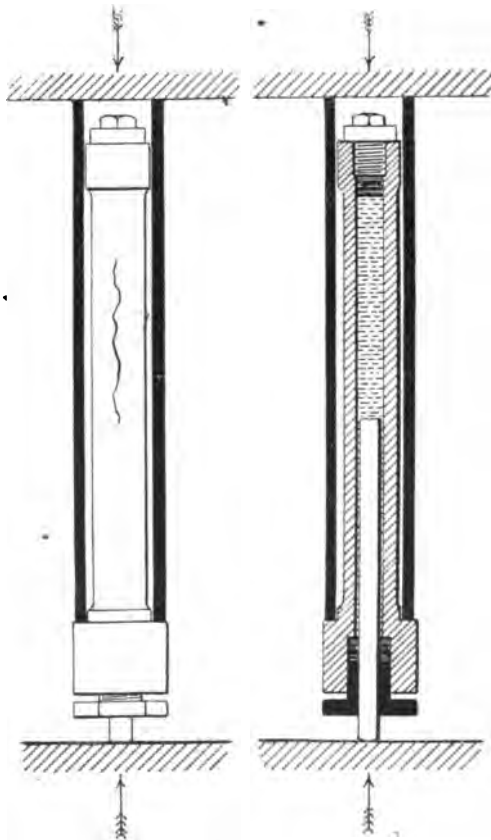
ELEVATION AND SECTION OF CAST-IRON TEST CYLINDER.
